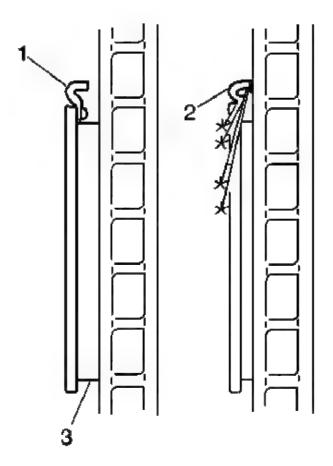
View Of Brake Pads & Audible Wear Sensors Courtesy of GENERAL MOTORS CORP.
